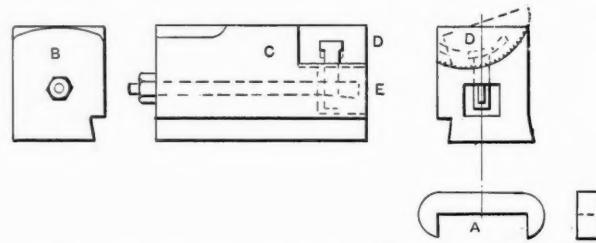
Adjustable Lower Die for Drawing and Finishing Tapers
